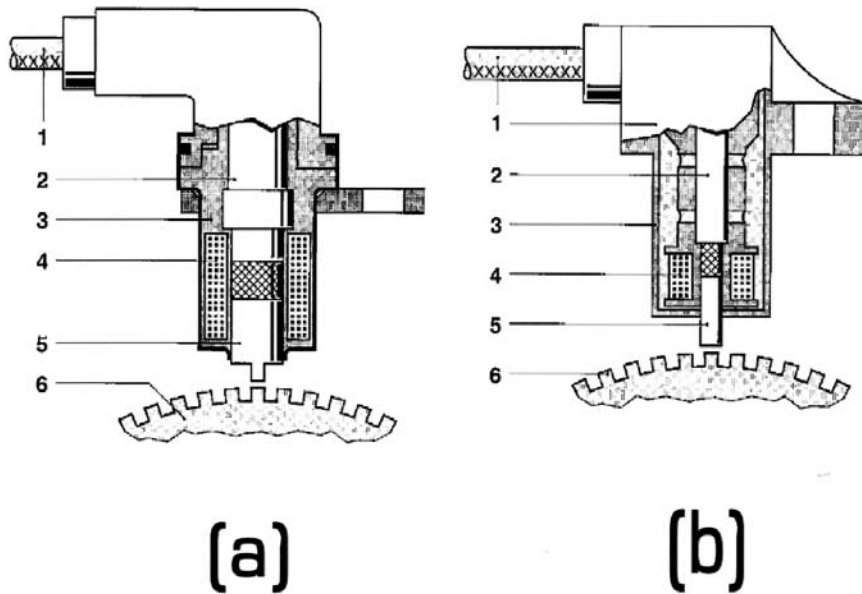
Sensor (a) has a chisel pole pin and sensor (b) has a cylindrical pole pin. The components in both: (1) electric cable, (2) permanent magnet, (3) housing, (4) winding, (5) pole pin, and (6) sensor ring. (Courtesy Robert Bosch GmbH, Stuttgart, Germany.)
